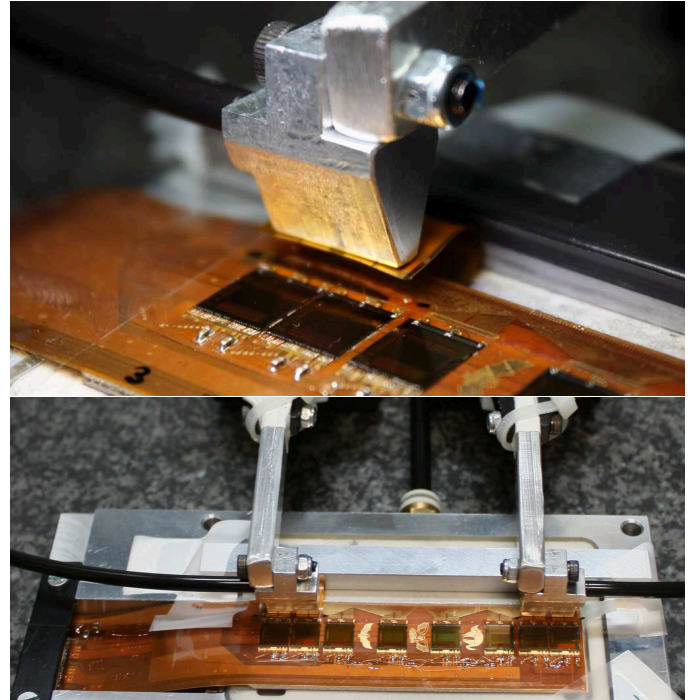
Bending and positioning of the flex fanouts using a custom vacuum tool attached to a positioner, which is normally used for probe needles.
